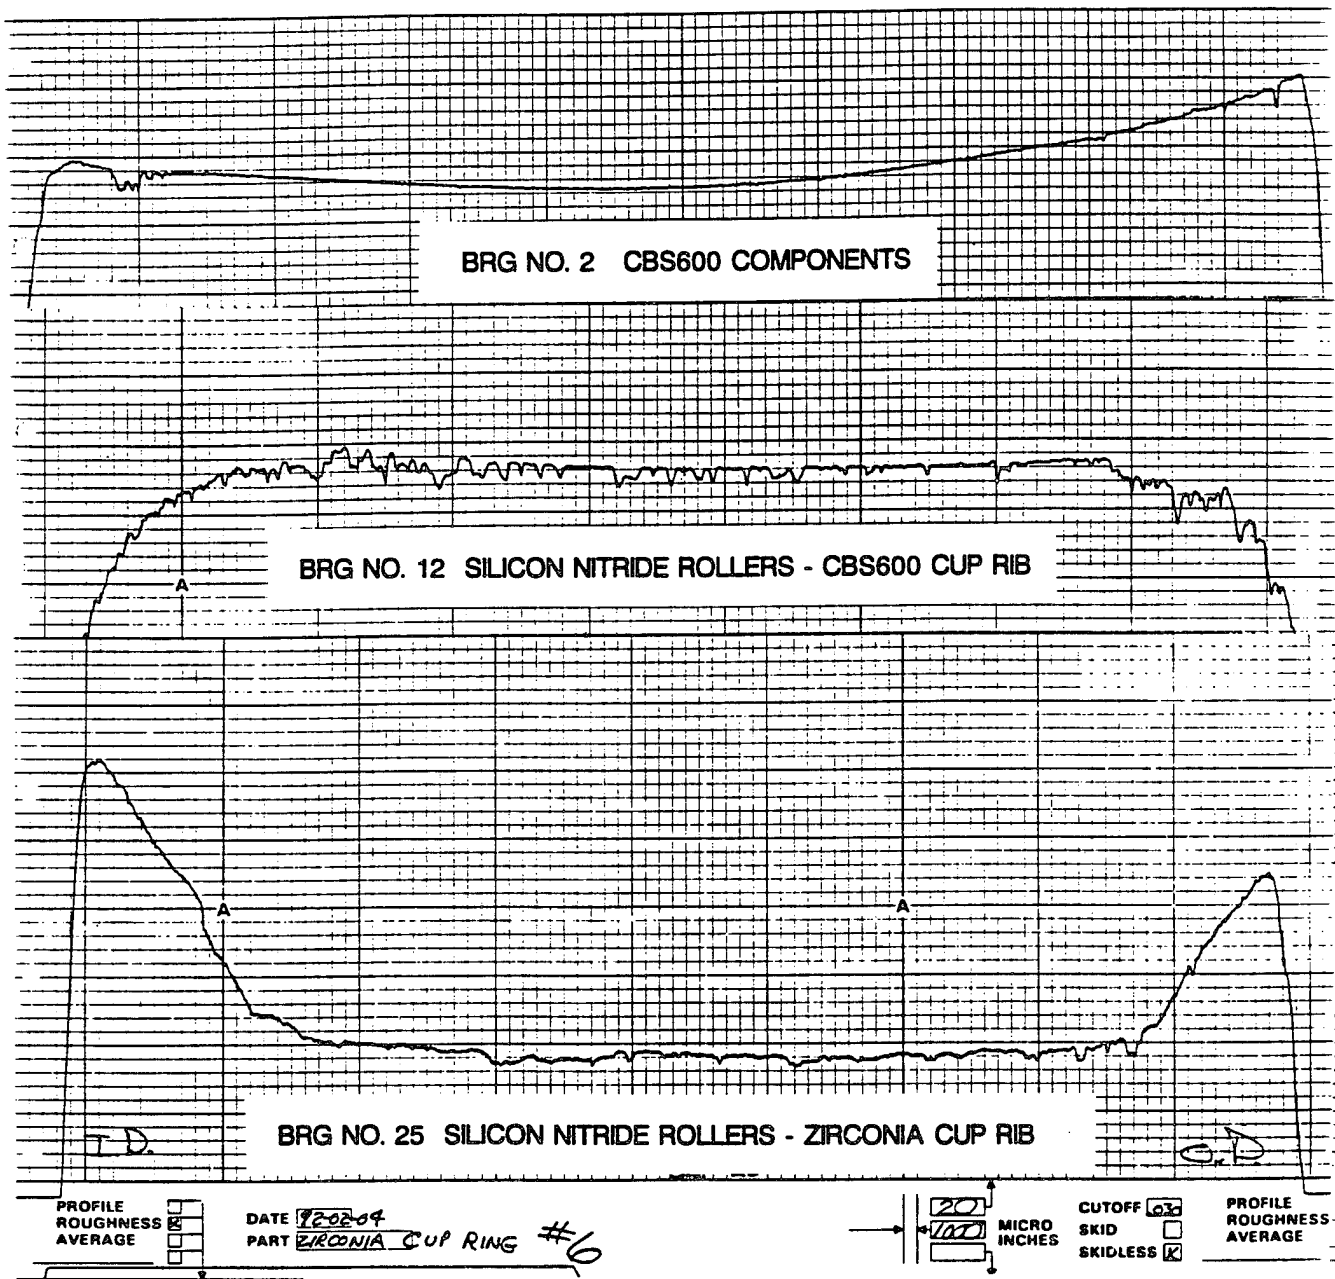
Posttest Cup Rib Face Profiles of Conventional and Hybrid Bearings
